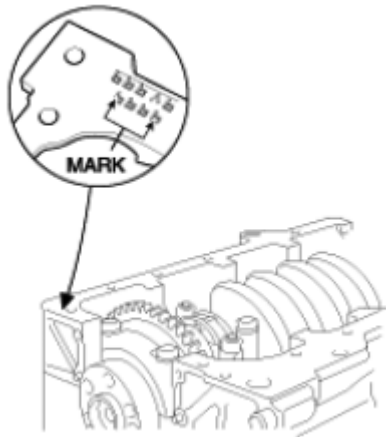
Identifying Cylinder Bore Size Code On Cylinder Block Bottom Face
